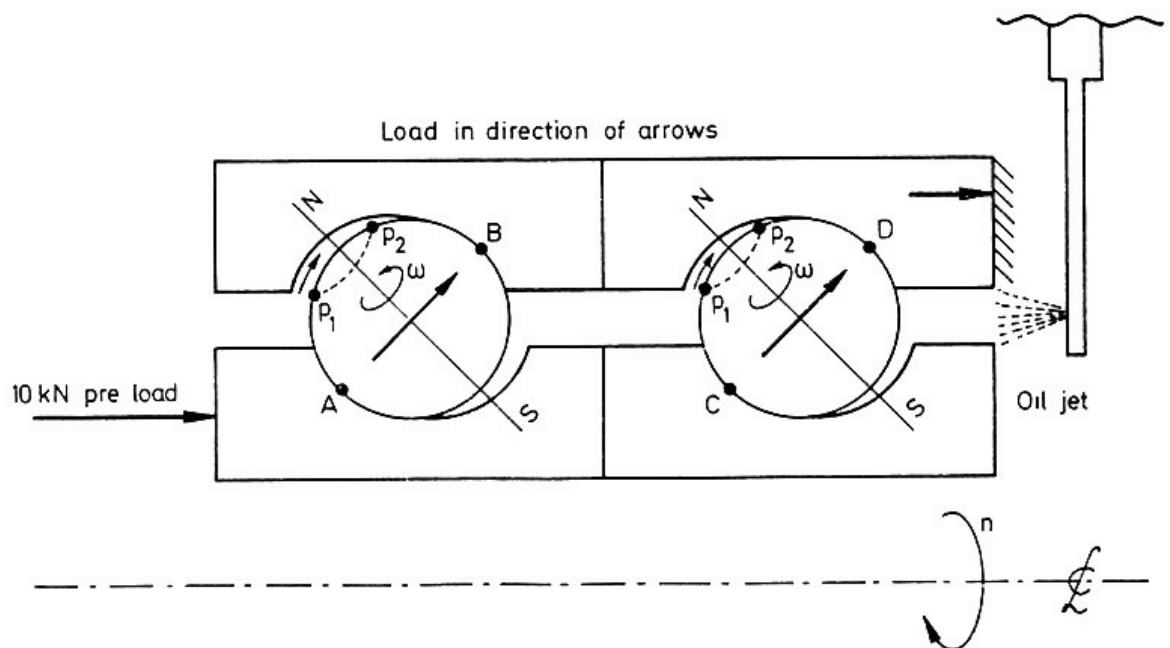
Schematic view of tandem set of deep-groove ball-bearing geometry under load, resulting in bearings acting as a centripetal pump
